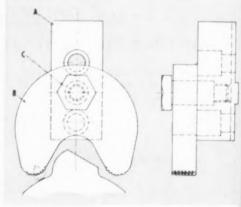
Modified chuck jaw for holding concentrically casting of type shown in Fig. 1.
